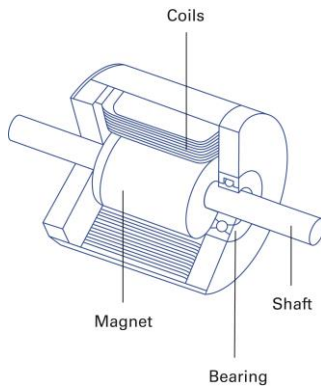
Design of a BLDC and SSV motor, respectively with rotor magnet, stator winding, bearing, and motor shaft.
